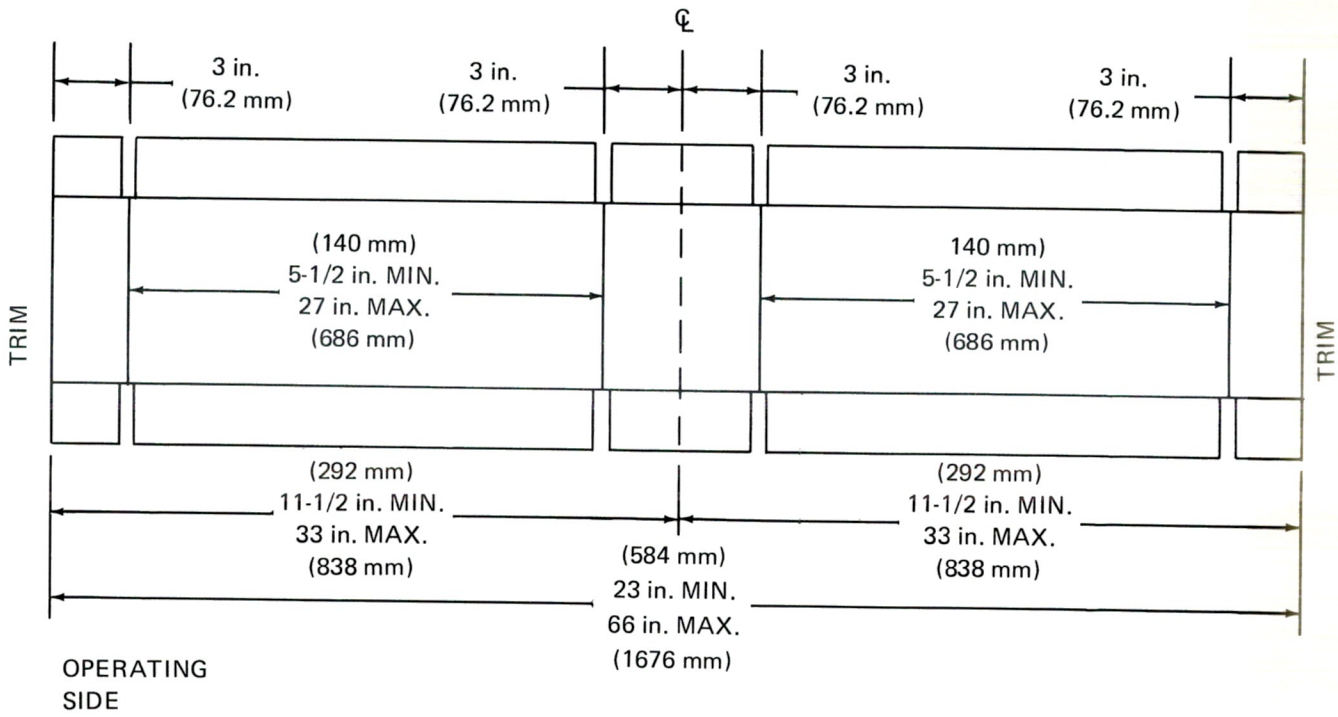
3 in. (76.2 mm) END PANEL WITH TRIM
